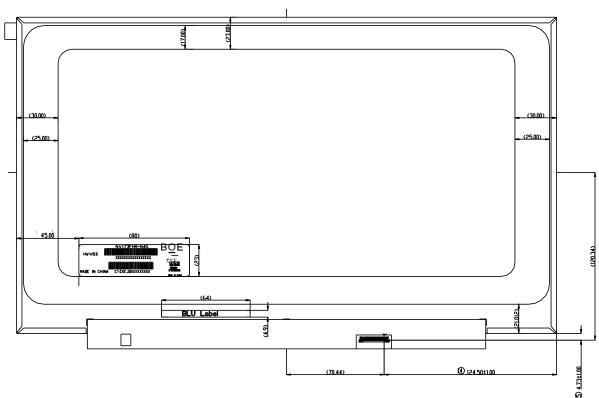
TFT-LCD Module Outline Dimensions (Rear view)
